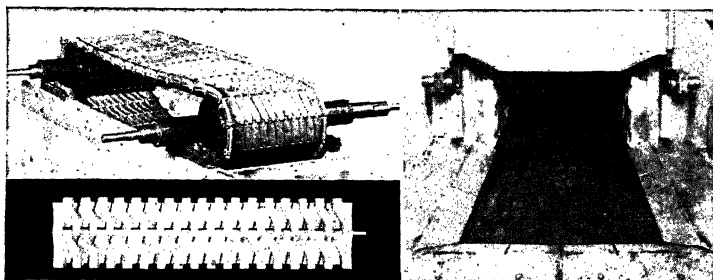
Flexible alloy belt consisting of one-piece spiral link castings which extend the full width of hearth. Lower view shows bottom side of casting, illustrating spiral link design.
